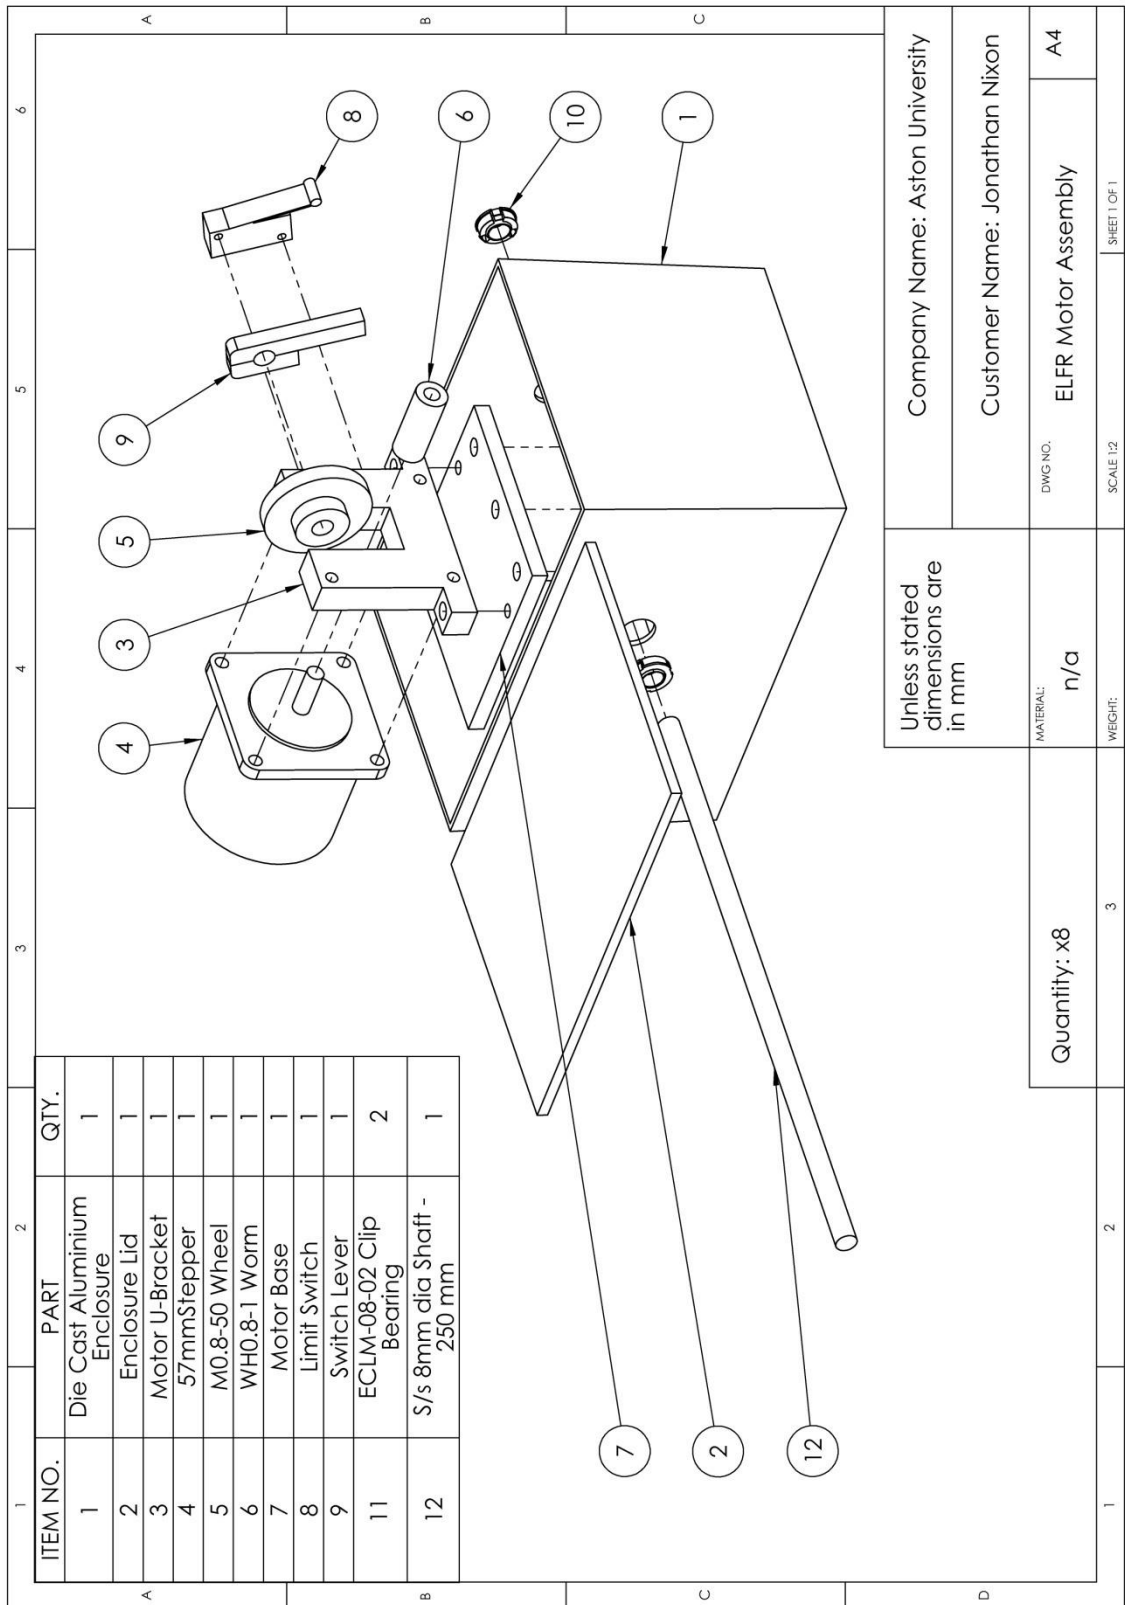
Exploded sub-assembly and BOM for the ELFR motor assembly.
